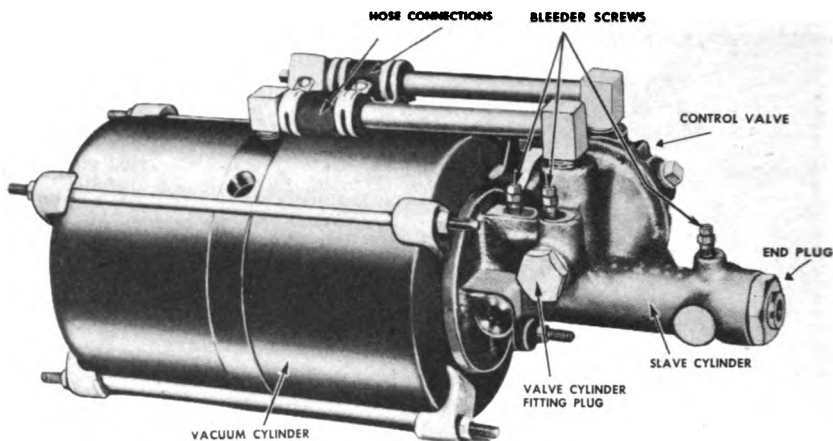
Hydovac Vacuum Power Brake Cylinder.
